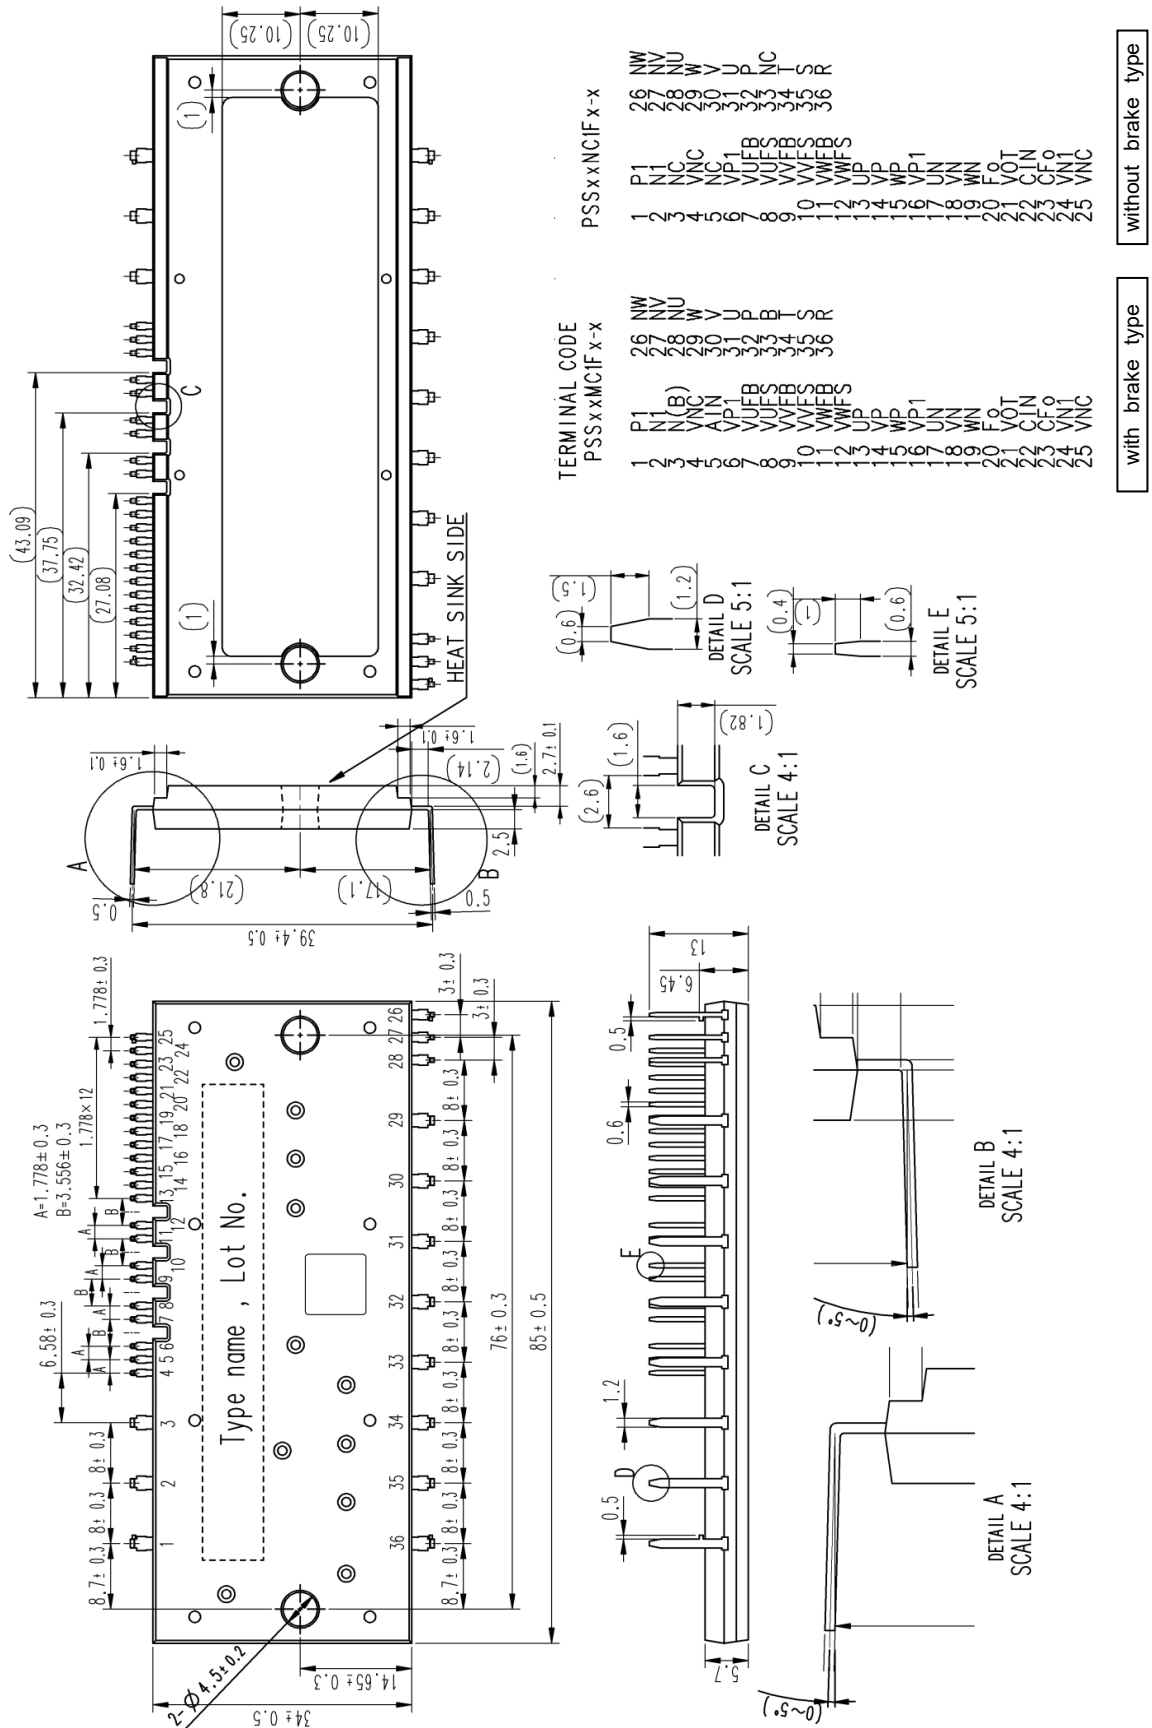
Package outline drawing (Dimension in mm)
